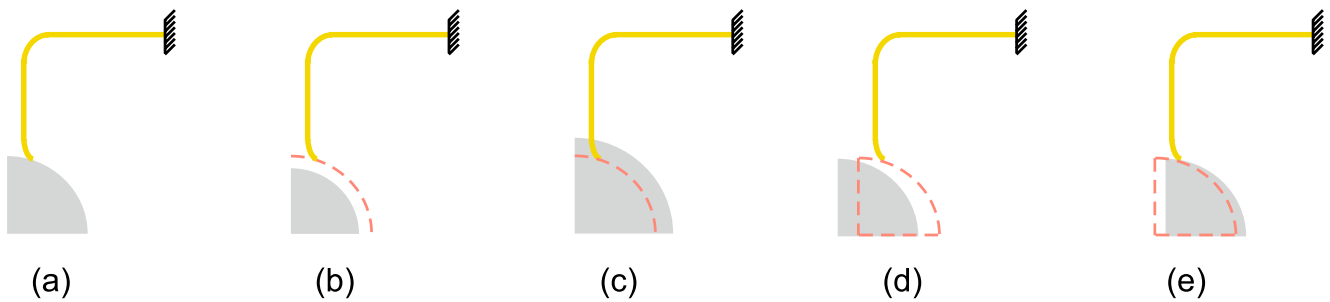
Significant geometric uncertainties for emulated pin-joints. (a) Ideal case, (b) Cam radius too small, (c) Cam radius too big, (d) Cam and contact not fully assembled, (e) Cam and contact over assembled
